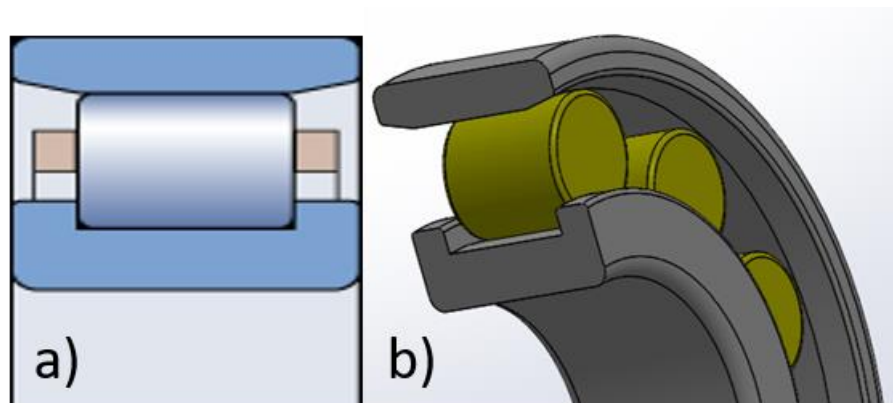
a) Cross-sectional view of a cylindrical roller bearing type 'N' Specification b) Similarly by Solid works.
